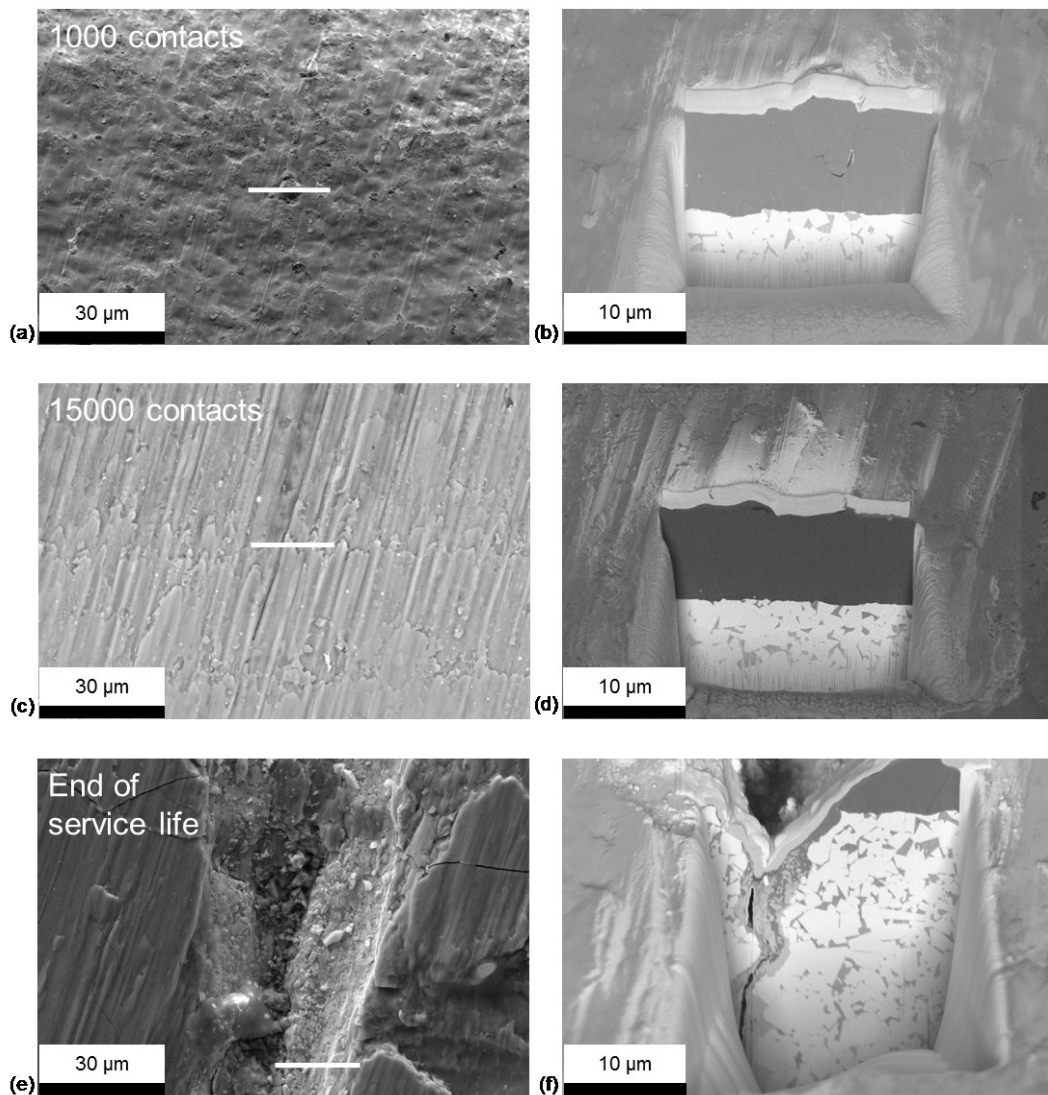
SEM micrographs showing surface topography of rake faces of milling inserts after (a) 1000 and (c) 15000 tool-workpiece contacts, (e) end of service life (about 40000 tool-workpiece contacts) – white lines in figures on the left indicate positions of FIB cuts. FIB cross sections of tools at (b) 1000 and (d) 15000 tool-workpiece contacts and (f) end of service life. Bright top layers on top of cross sections are protective platinum layers.
